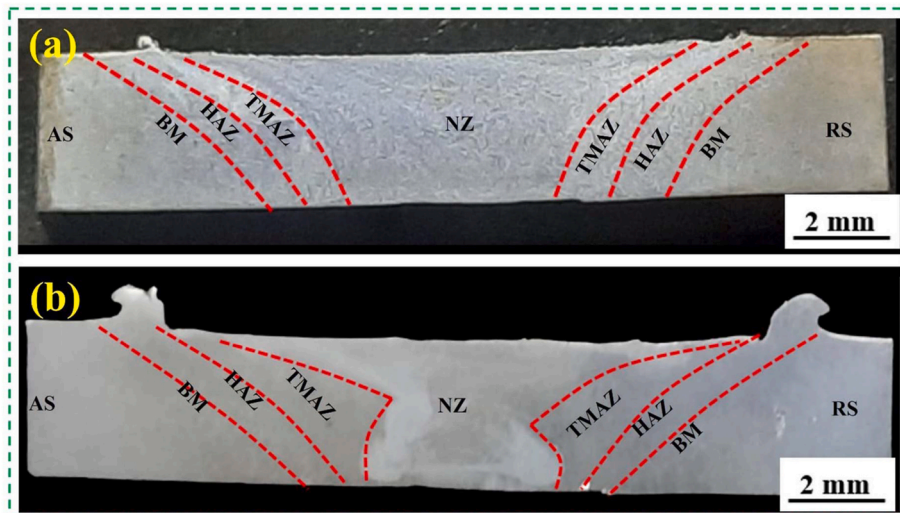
Macroscopic observation of cross-sectional samples obtained by (a) SQ tool, and (b) CT tool.
